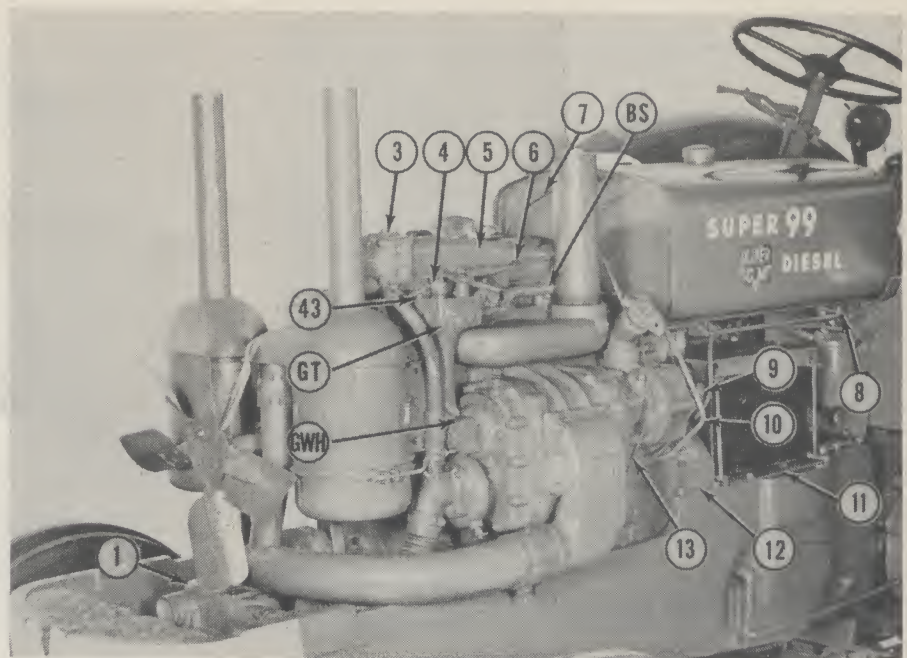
Left side view of a GM engine installation in an Oliver Super 99 tractor.
